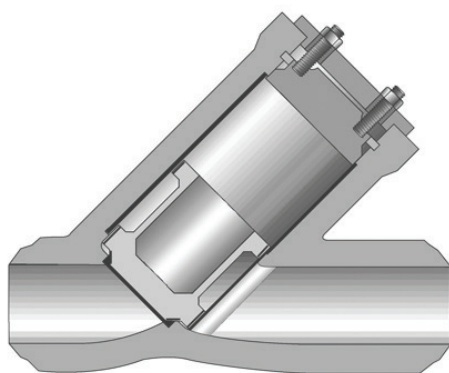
BY "Y" Pattern Stop-check, Butt Weld Ends
